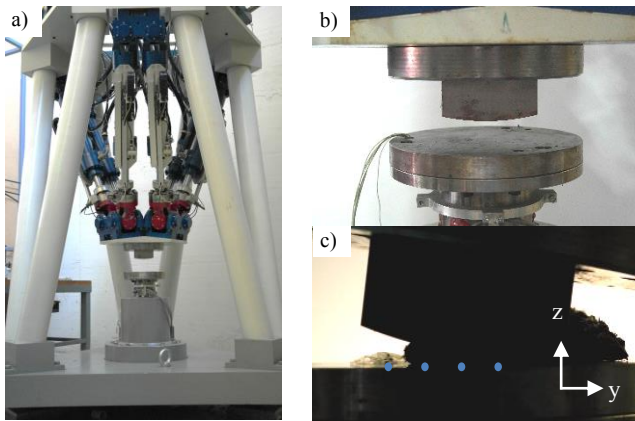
a) image of the experimental machine; upper part: six hydraulic actors with glass scales and load cells; b) upper and lower tool; c) position of the thermocouples in the process
